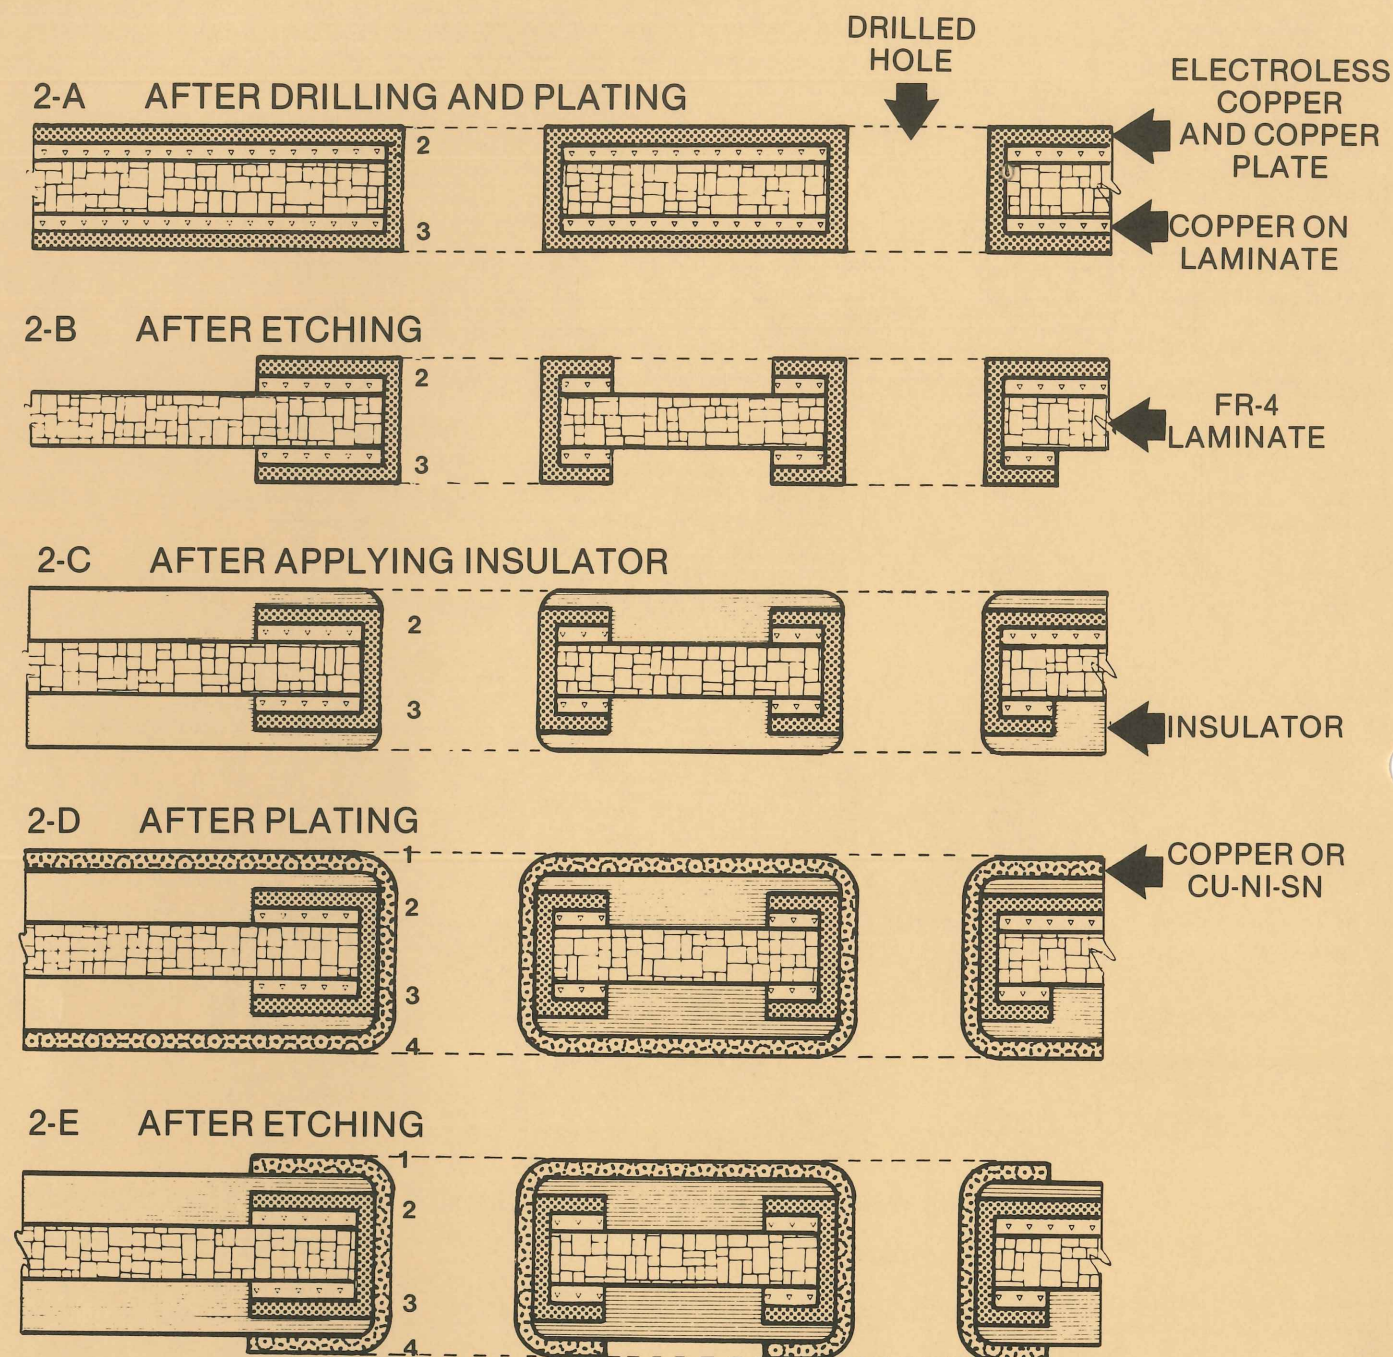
Unilayer board construction proceeds in five stages: drilling holes in the laminate, plating, etching layers 2 and 3, applying insulator, and etching layers 1 and 4.
